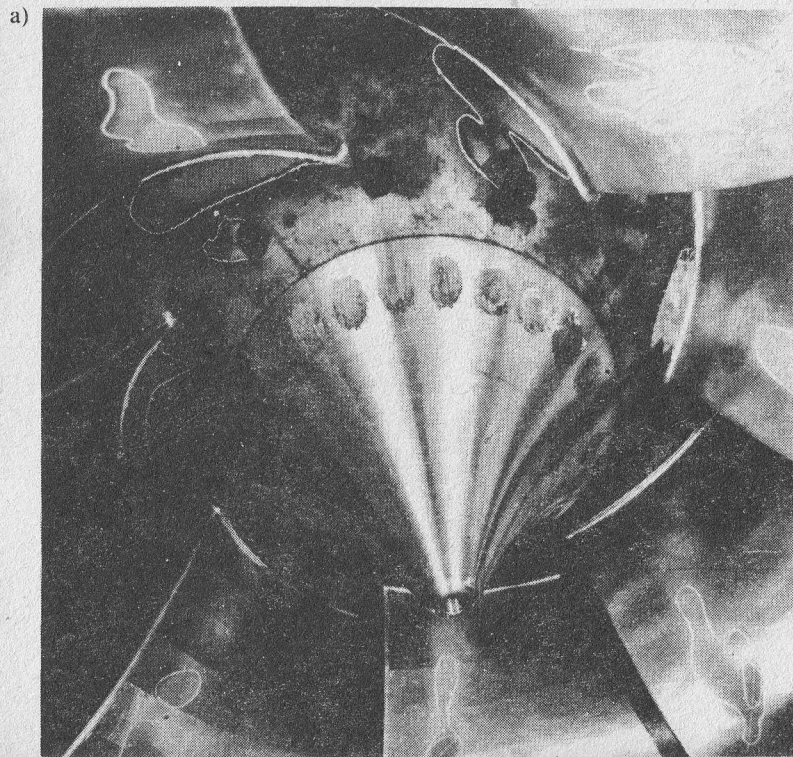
Reversible machine runner from hydro plant at Żydowo; a) general view, b) part of damaged hub
